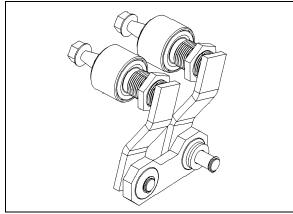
DRIVING MECHANISM (DRIVER SIDE) 23334
